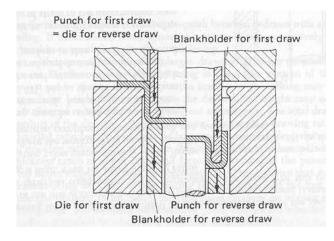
Reverse deep-drawing of seamless tubes. On the left it is displayed the configuration before drawing, while on the right is that during the operation.
